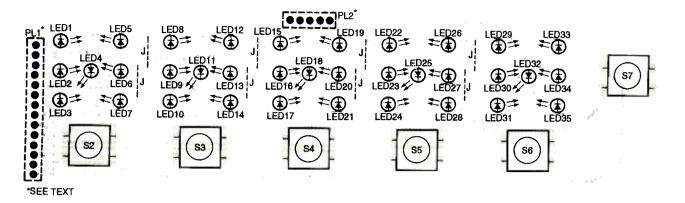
Here's the parts-placement diagram for the display board. For a more dramatic display, you may want to paint the component side black before mounting the parts.
